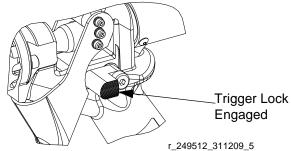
Trigger Retainer Unlocked and Trigger Lock Engaged
